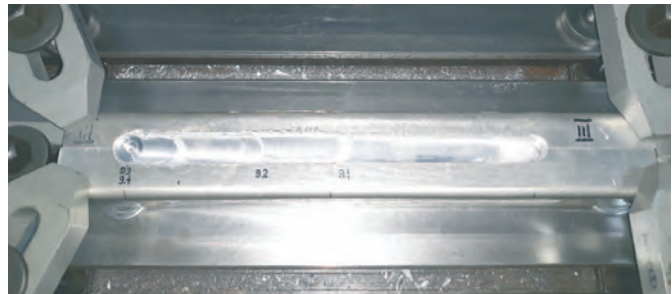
Appearance of the FSP 9.1 – FSP 9.4 passes, to improve the initial FSW-made weld with mark III.
